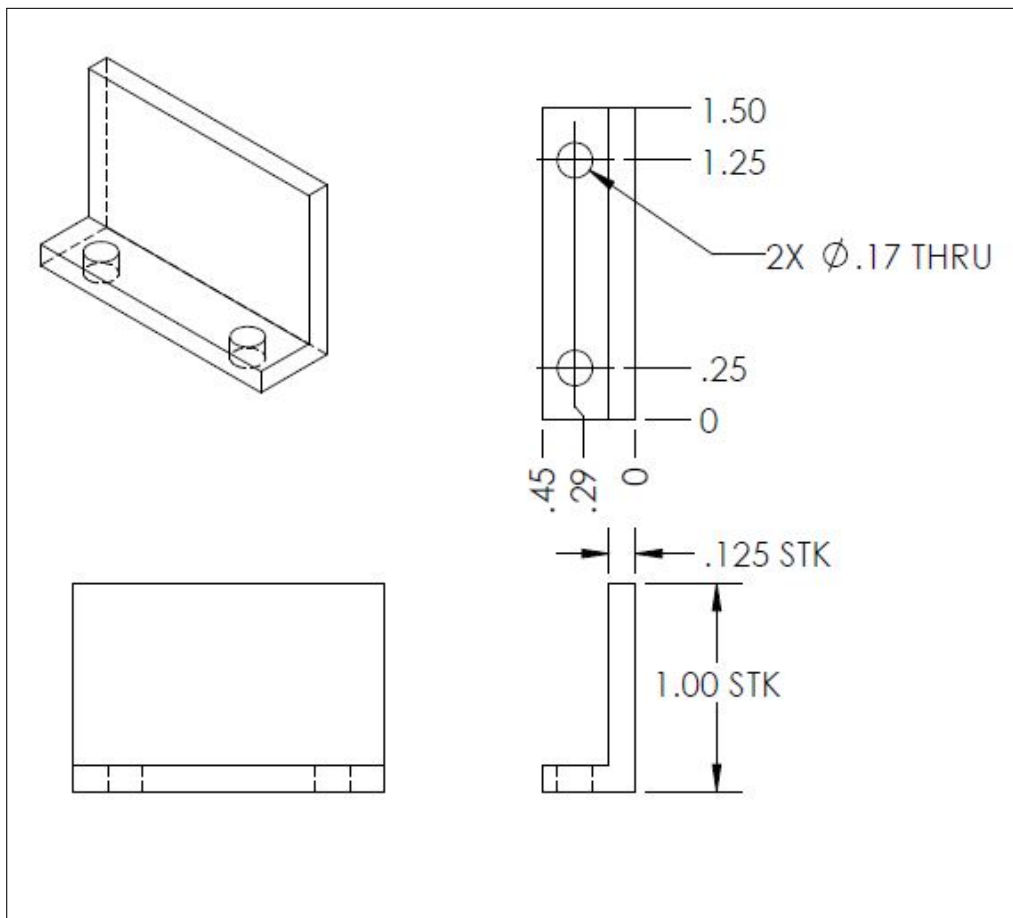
Mobile Base - Rear Mounting Foot Detail. Material: Aluminum. UNLESS OTHERWISE SPECIFIED, ALL DIMENSIONS ARE IN INCHES.
